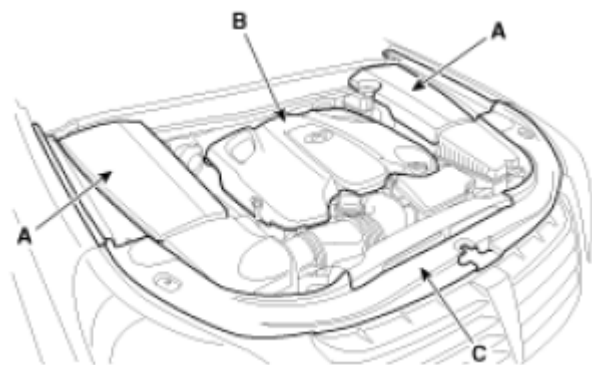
Identifying Engine Room Cover, Engine Cover And Radiator Grill Upper Cover
